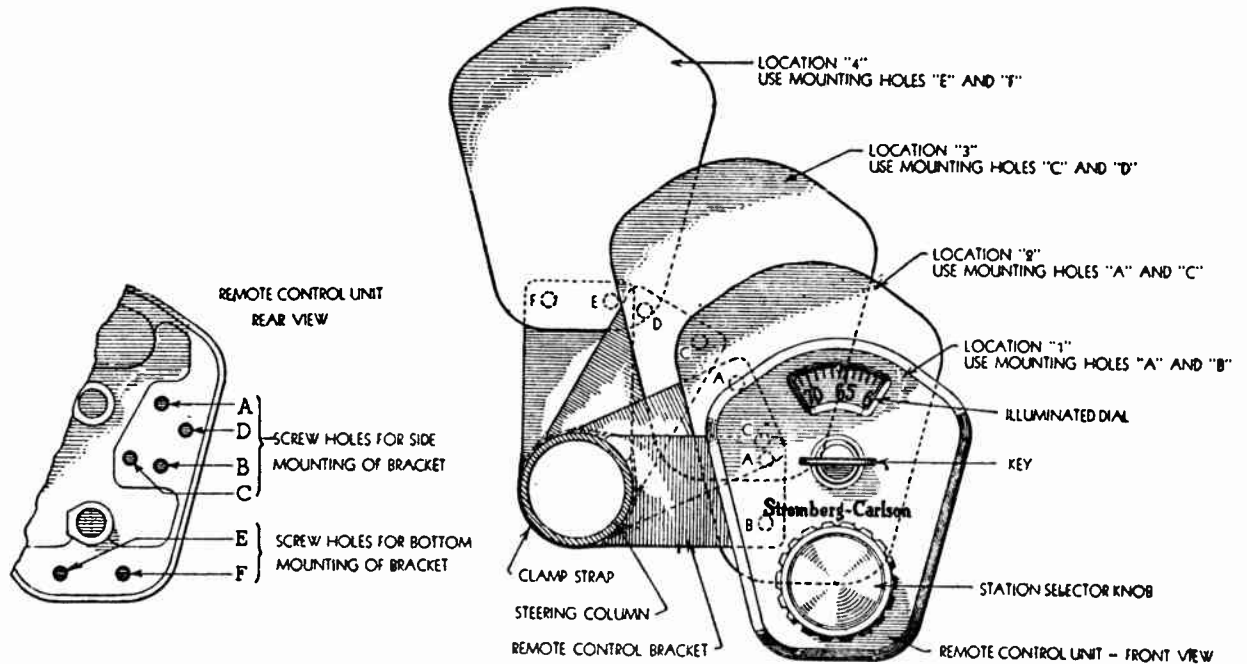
Arrangement of Possible Angles of Mounting of Remote Control Unit.
